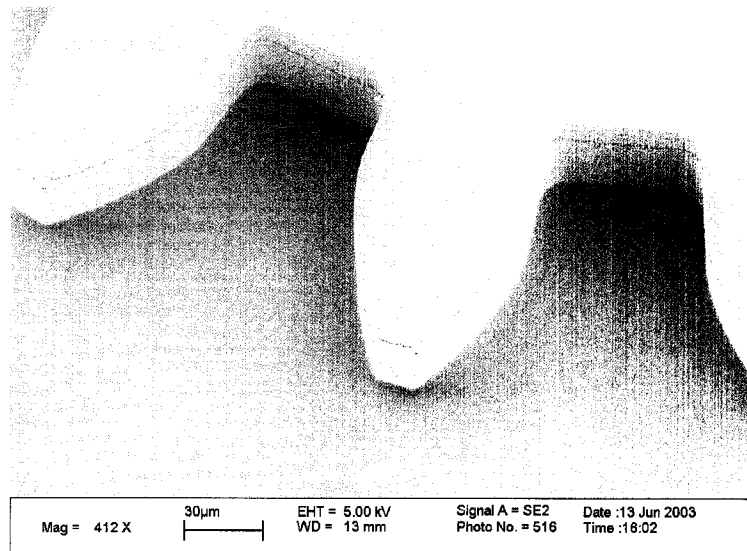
Perspective view of 16-tooth spur gear teeth.
